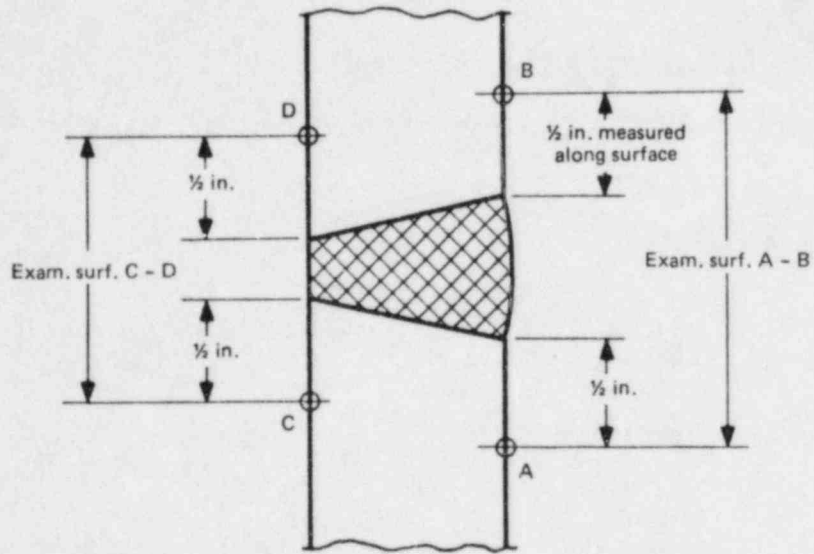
WELDS IN PUMP CASING AND VALVE BODIES
